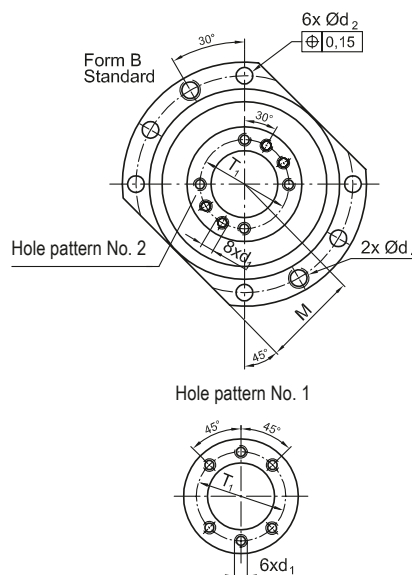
IBC precision flange unit for ball screw spindle nut BNBU 75 QB 178.2.DBL.M1
